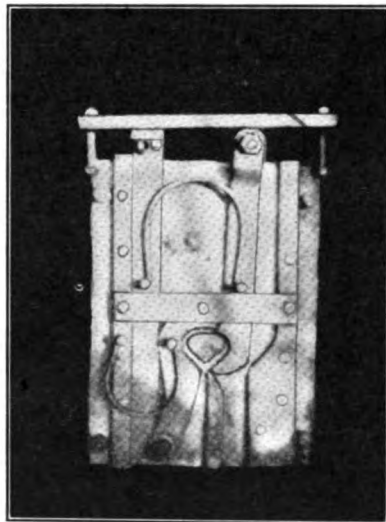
THE HANDLE FORMING PLATE CLOSED
